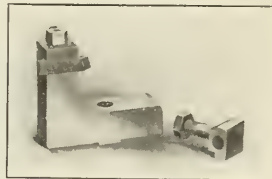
Knee Turner for Roughing and Finishing Cuts
